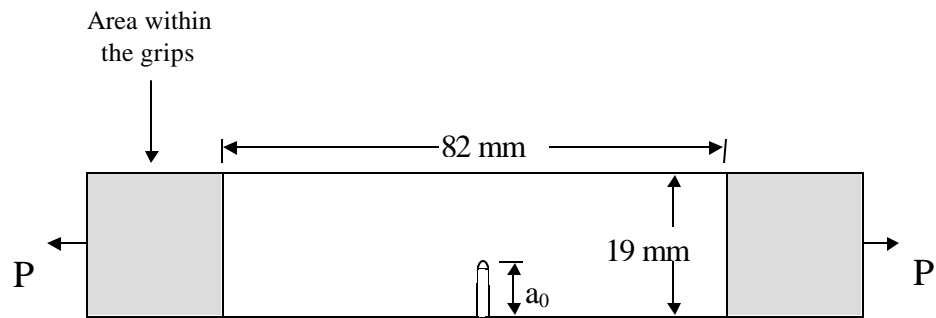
Schematic illustration of the MSE(T) specimen geometry with the dimensions tested. Not to scale.
